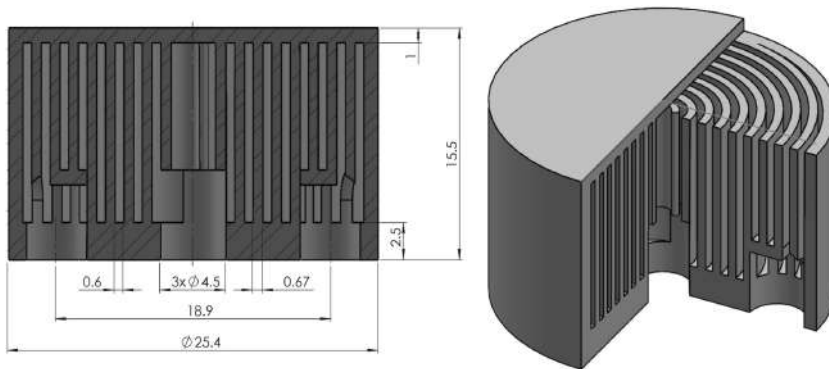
Geometric configuration of active cooled metallic mirror - side view and isometric view.
